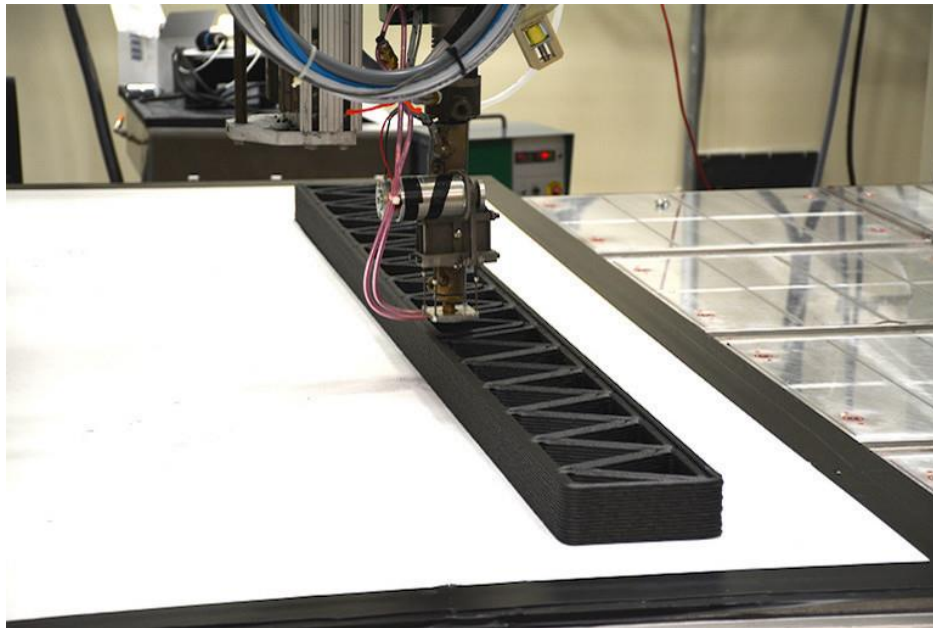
Big-Area Additive Manufacturing Printer at Oak Ridge National Laboratory [11]
